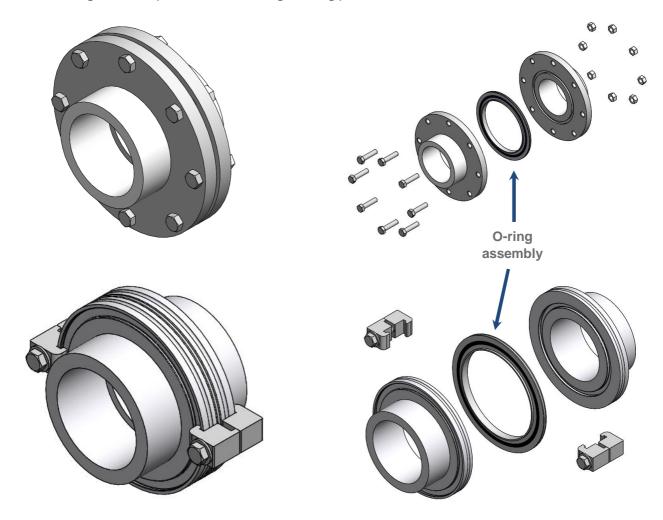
ISO-F (top) and ISO-K (bottom) flange interface with assembled (left) and exploded view (right)
